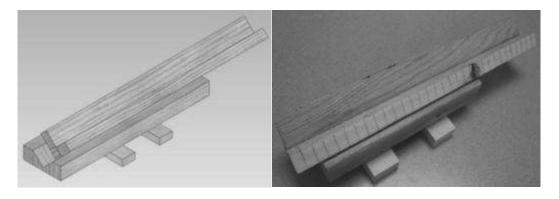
Solid Model and Physical Jig used for Drilling Holes.
